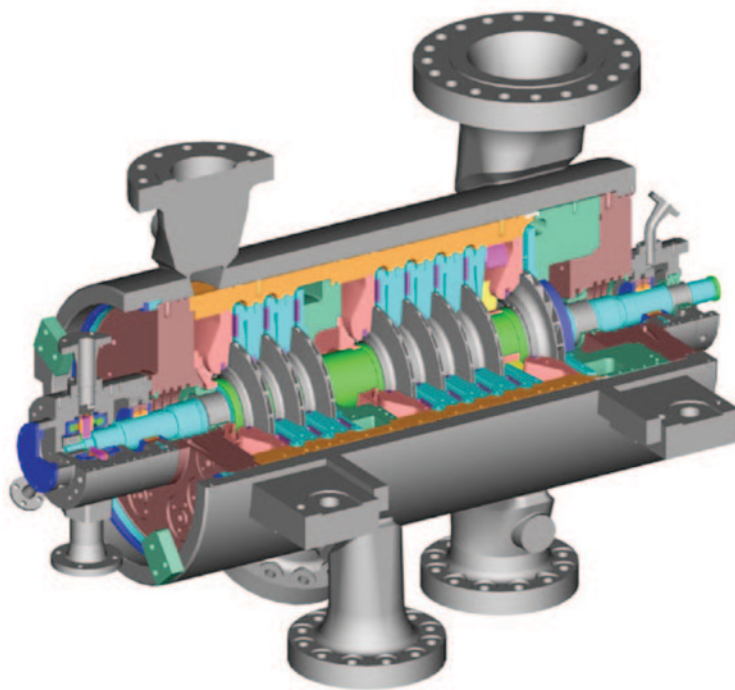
Multi-Stage Back-to-Back Centrifugal Compressor
